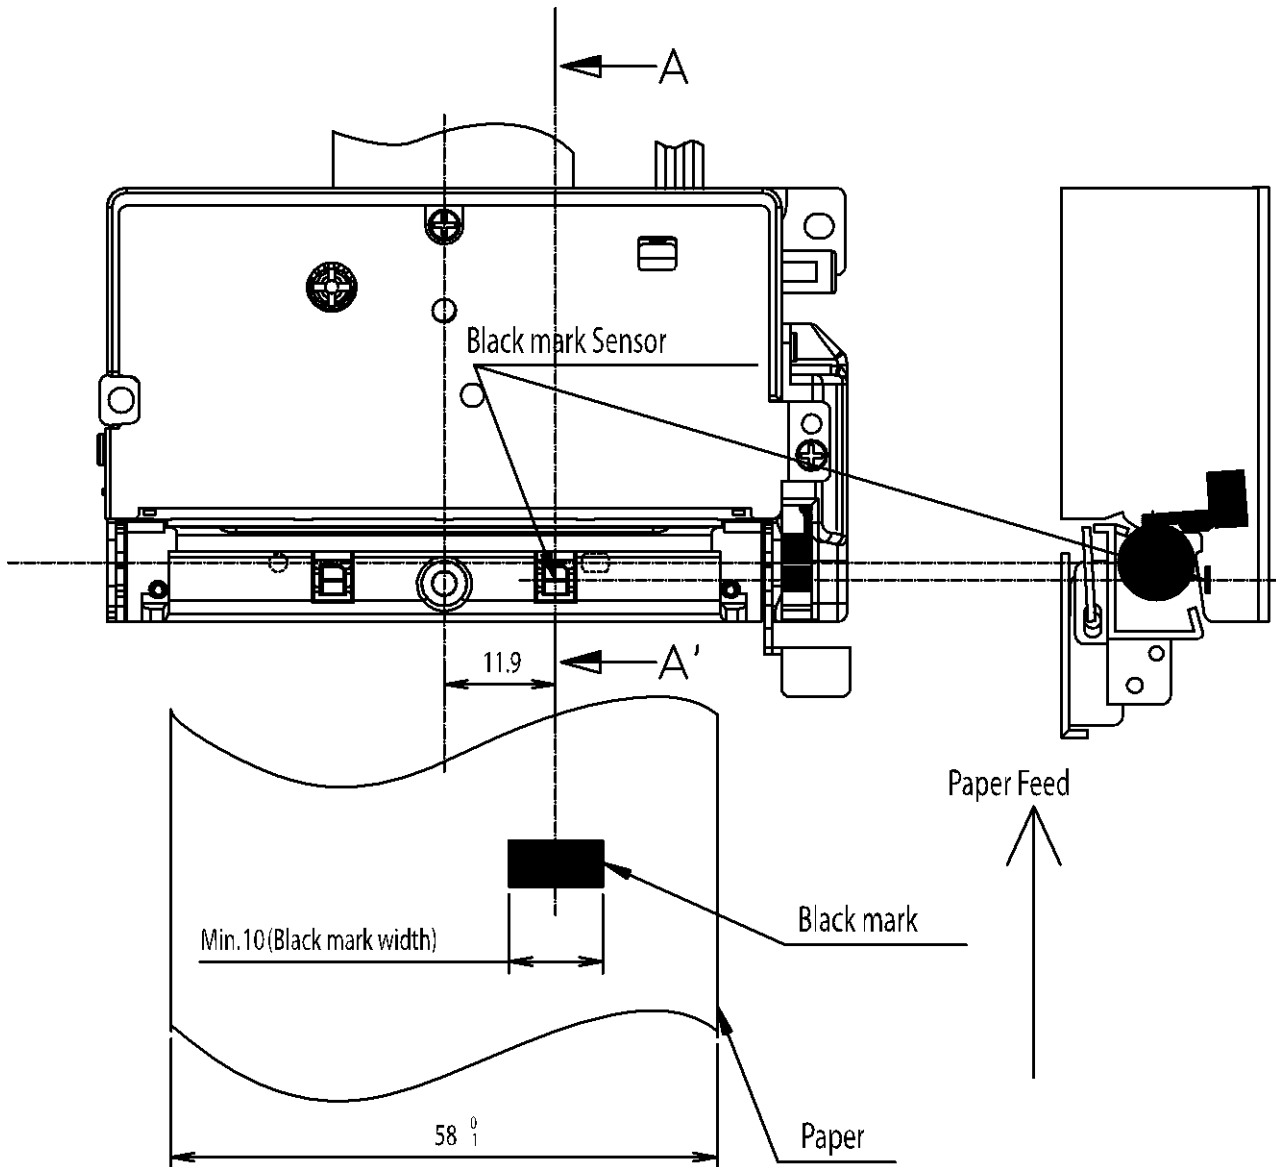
Dimensions related to black mark, and recommended size of black mark
